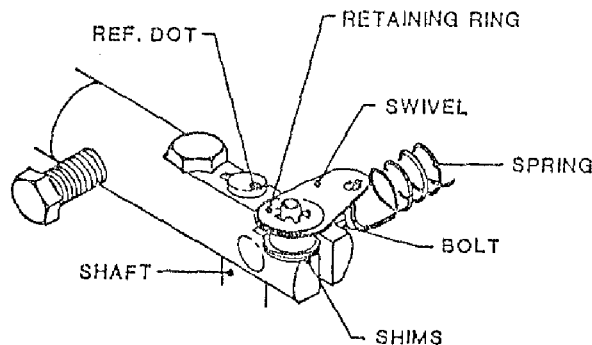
Take-up Arm and Supply Arm Assemblies
